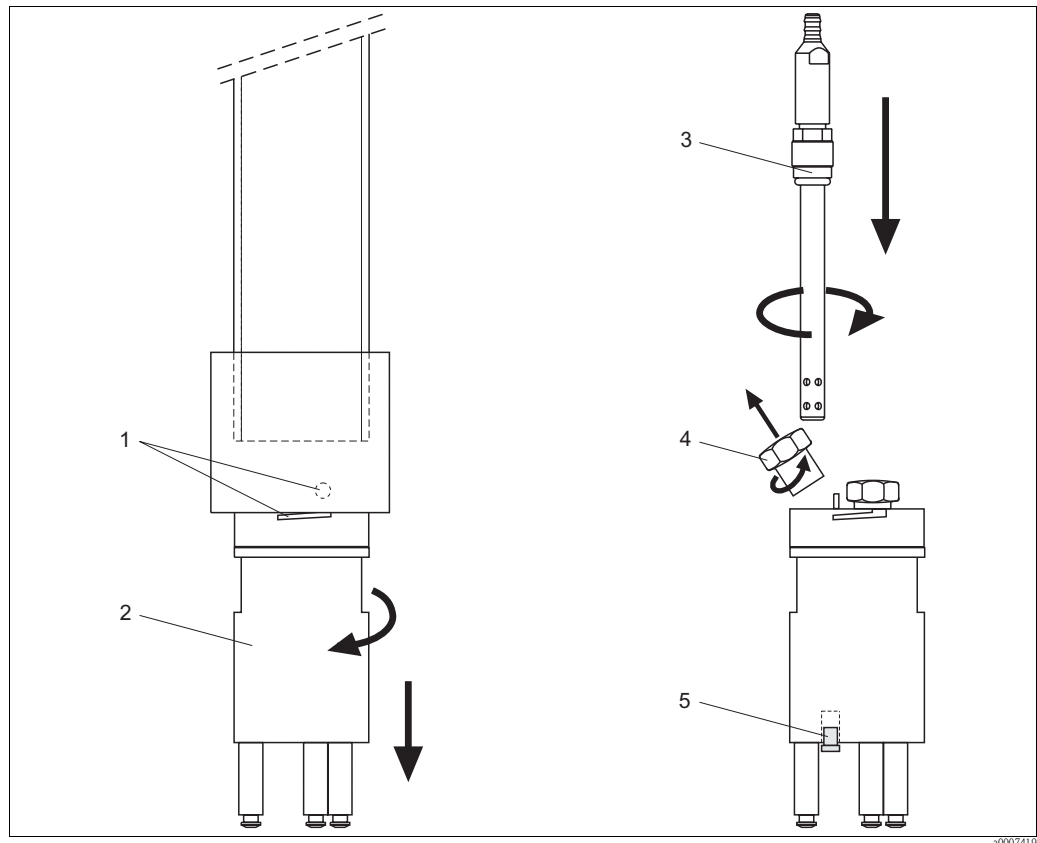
Removal of the sensor holder and installation of the spray cleaning system CPR31
